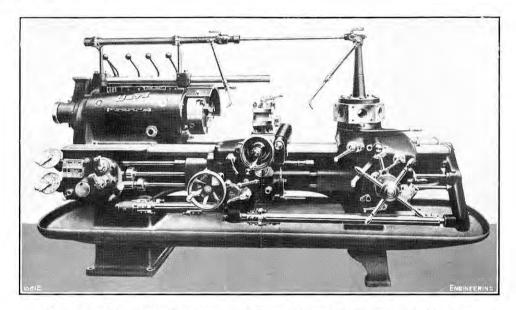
16-in, Swing Combination Turret Lathe; H. W. Ward & Co., Ltd.
